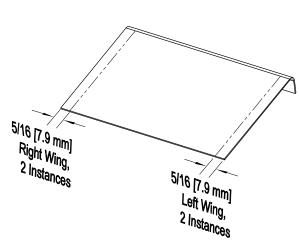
MARK THE REAR SPAR DOUBLER PLATE
